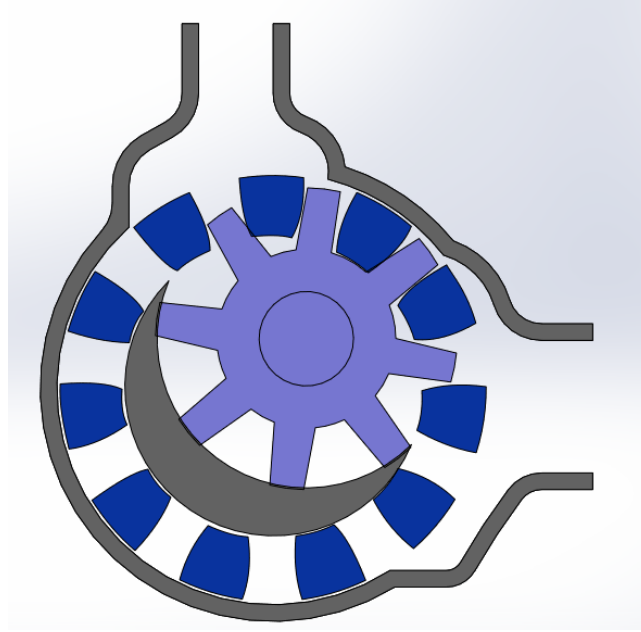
Internal gear pump. Note how the follower gear (light blue) is offset from the direct center of the pump body.
